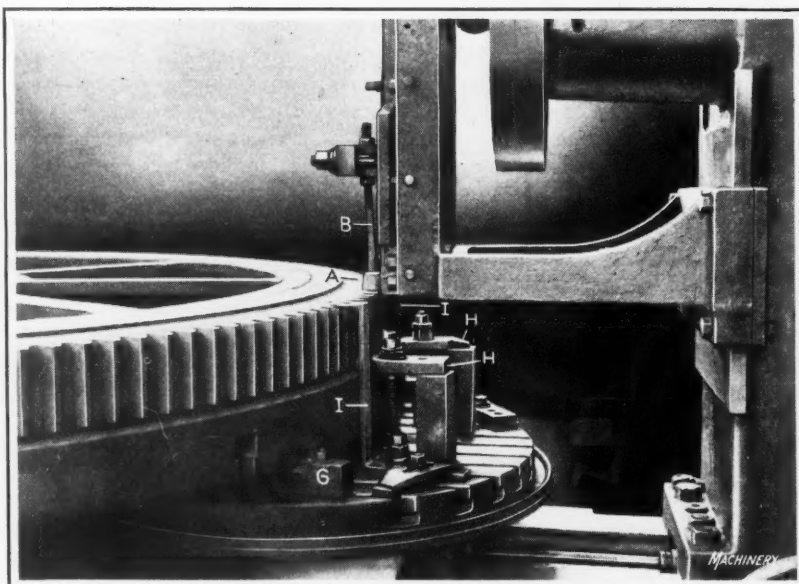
Slotter shown in Fig. 1, engaged in cutting Teeth of a Gear to mesh with Pinion shown in Previous Illustration
